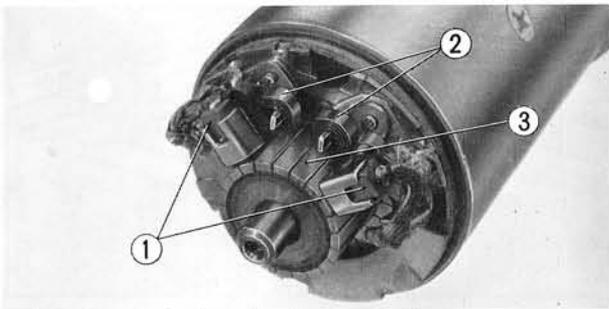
① Carbon brushes ② Brush springs ③ Commutator
